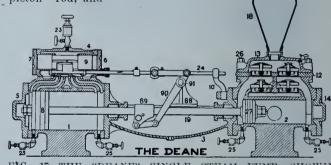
THE "DEANE" SINGLE STEAM PUMP, SHOWING DETAILS OF CONSTRUCTION
